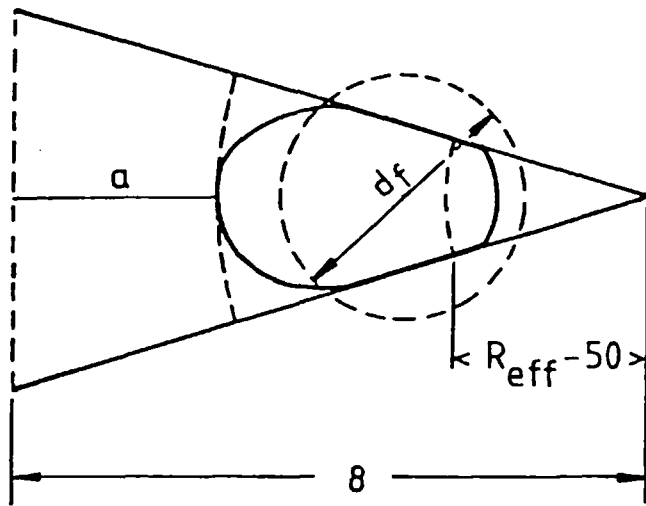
Cross-section of geometry of filament in groove of take-up wheel.
